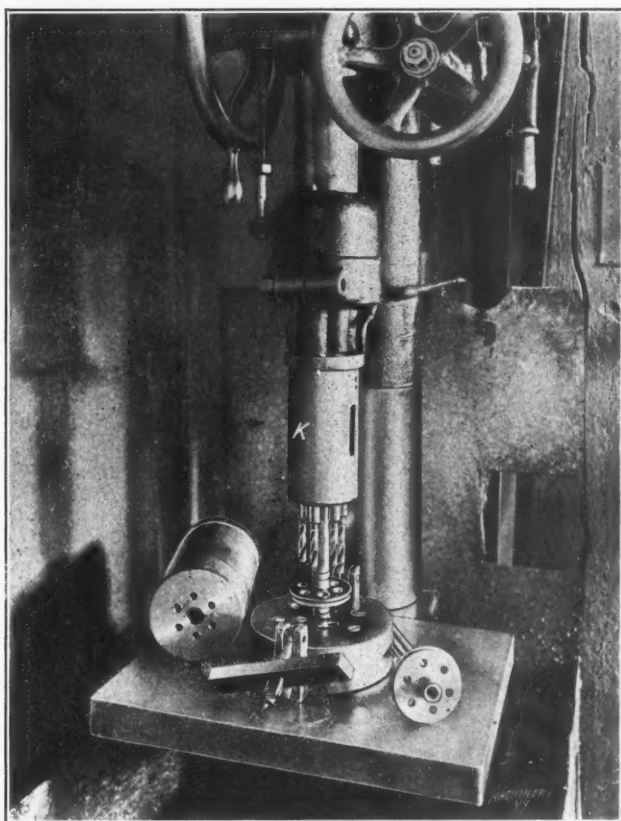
Multiple Spindle Attachment for Drilling the Rivet Holes in the Spindle Flange and Bowl
